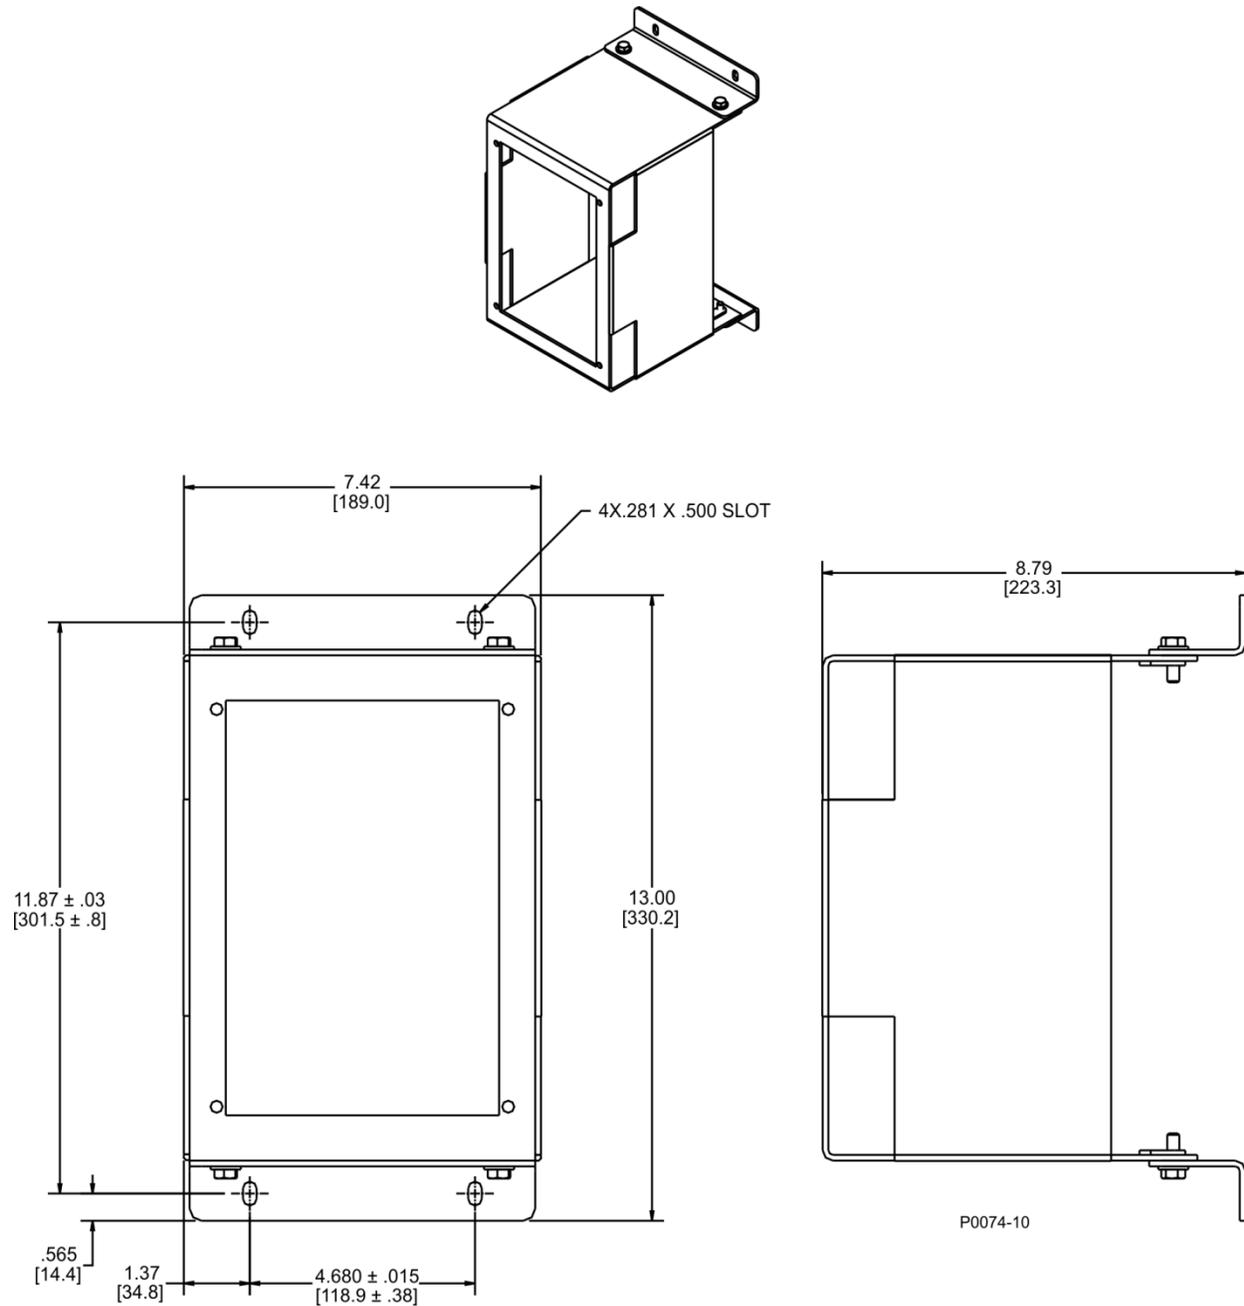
Pivoting Projection-Mounting Kit (Basler P/N: 9424226101)
